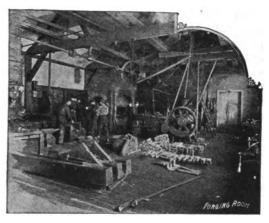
A WELL EQUIPPED FORGE SHOP FOR TURNING OUT AXLES.
